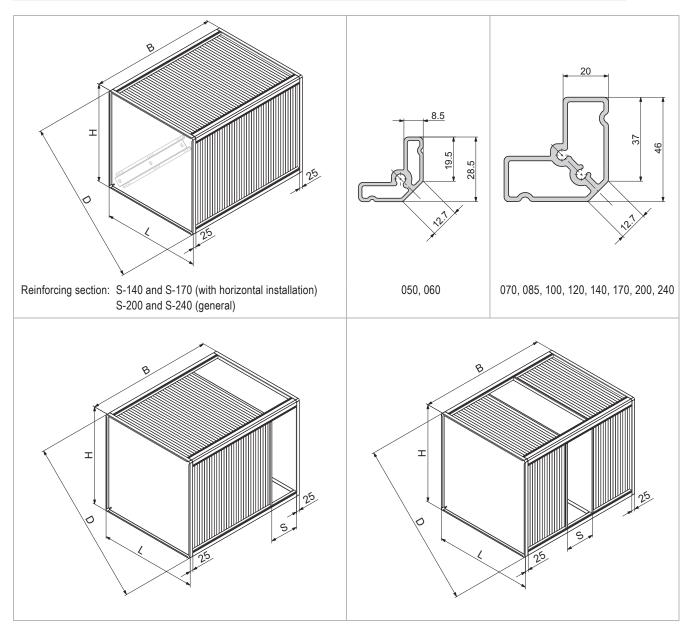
Dimension sheet for design S plate heat exchangers without dampers (dimensions in mm)
